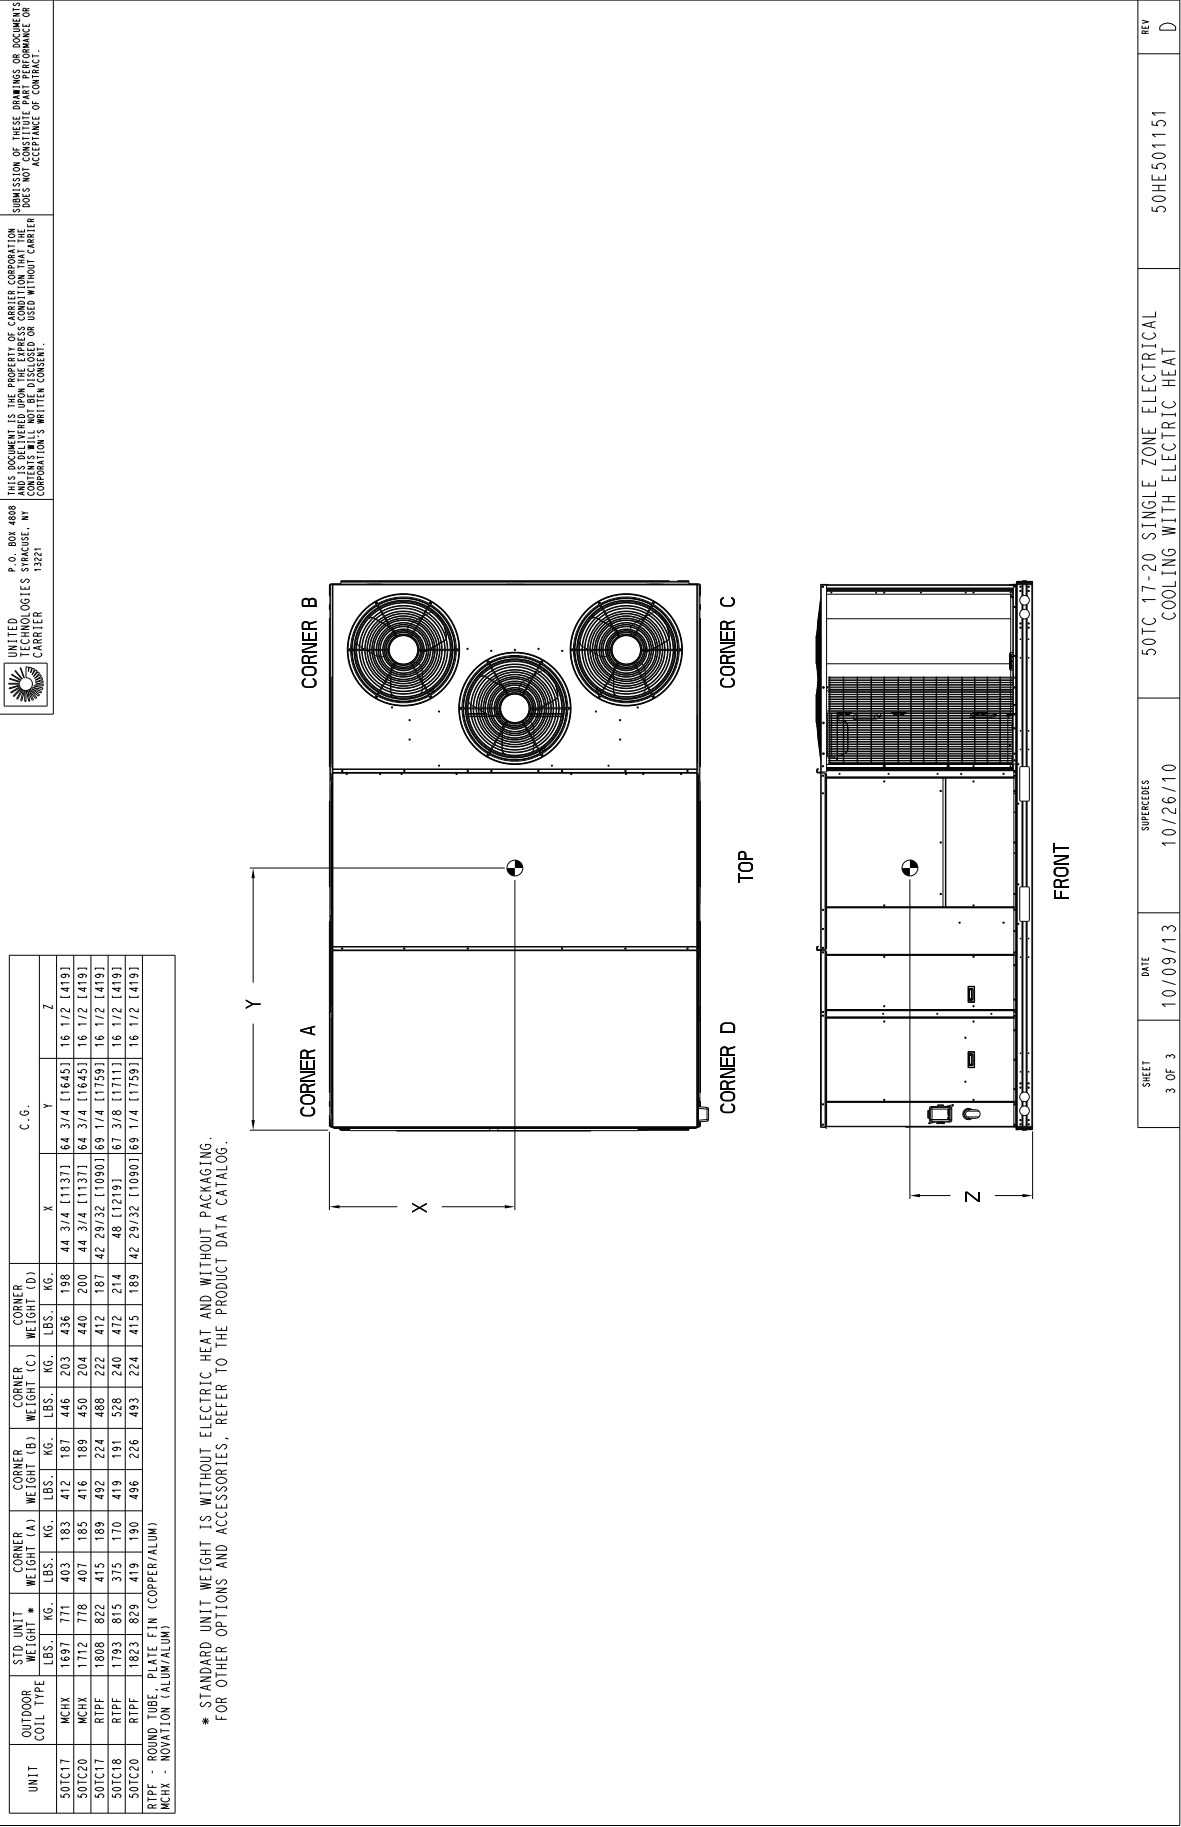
Unit Dimensional Drawing – 18 Size Unit
